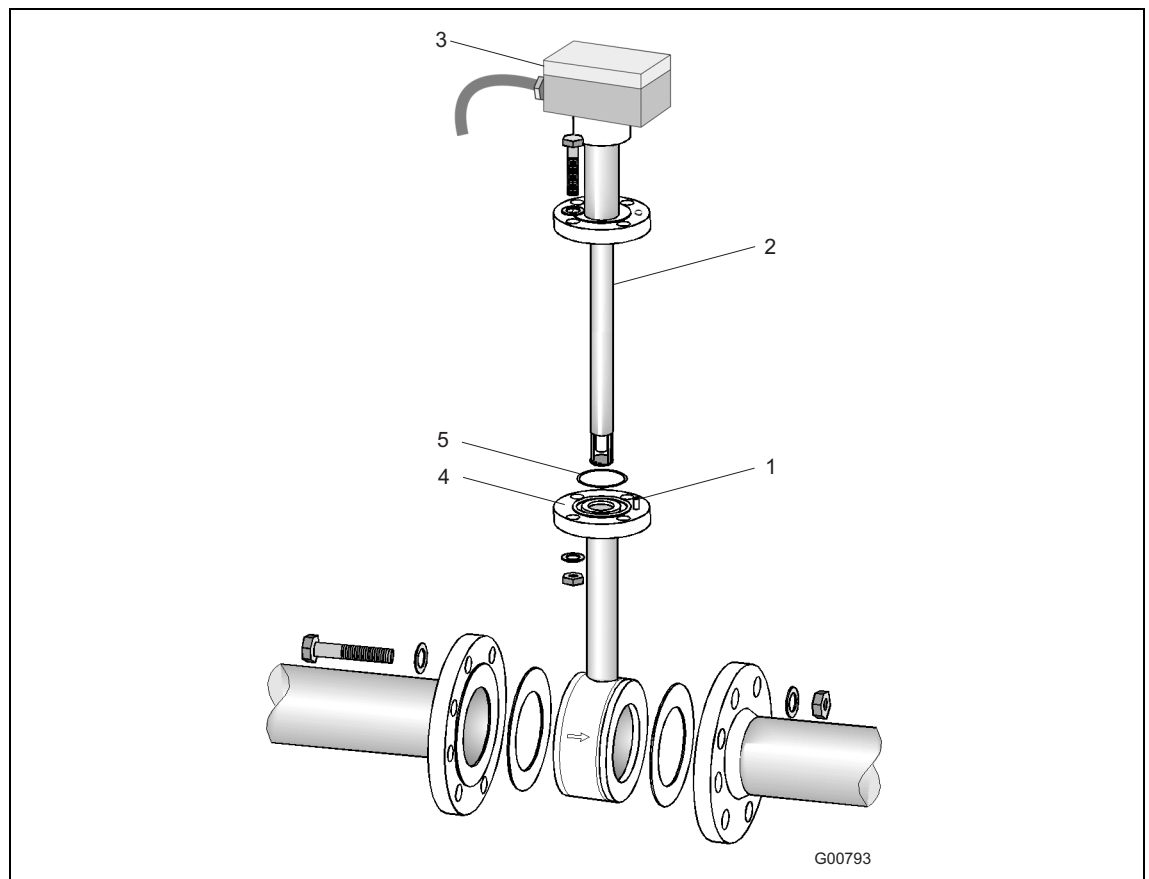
Schematic representation of type 1 pipe component with wafer design
